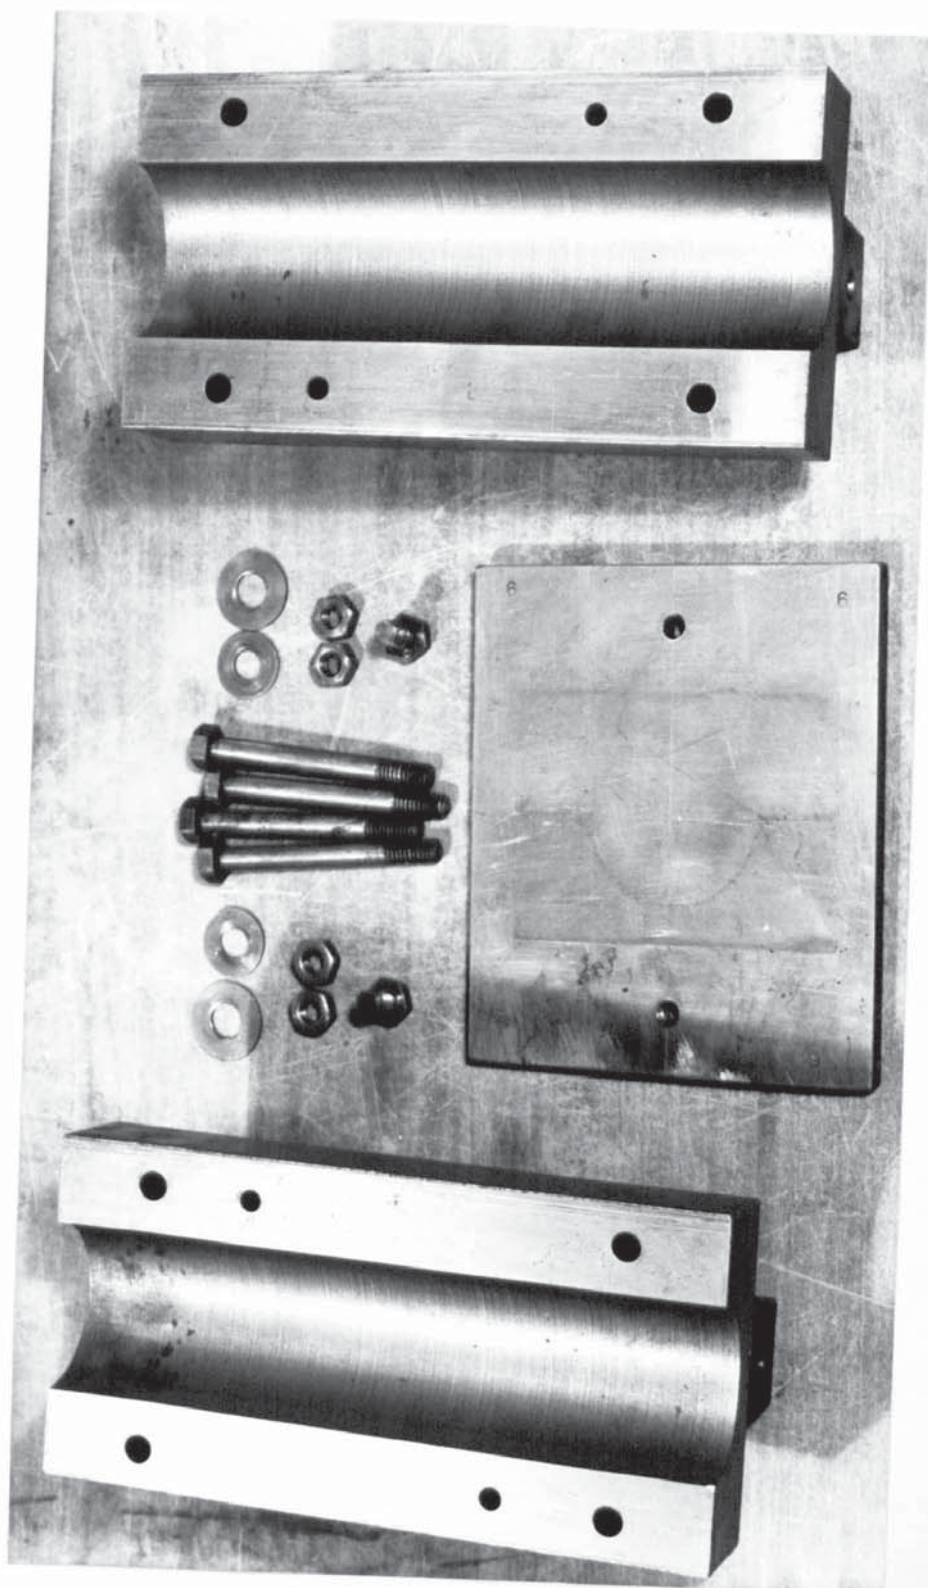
GENERAL AND DETAILED VIEW OF A MOULD
